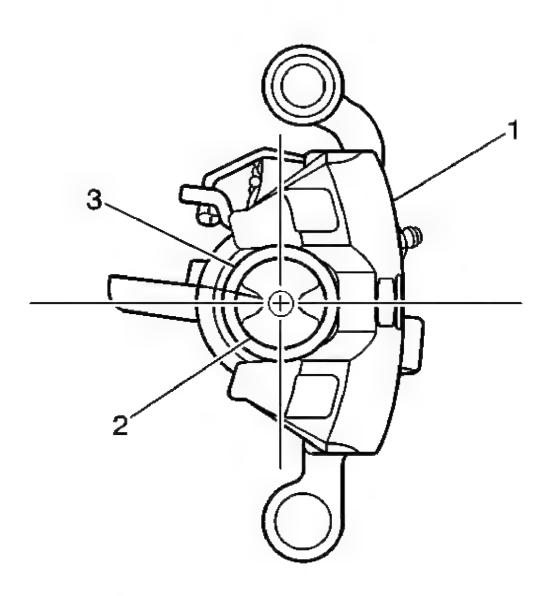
Rotating Piston In Caliper Body Courtesy of GENERAL MOTORS CORP.
